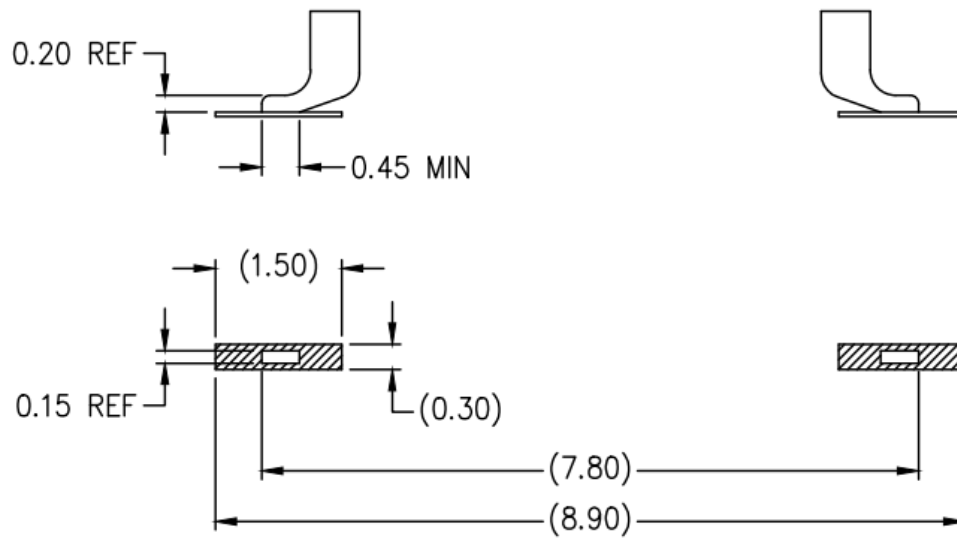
SODIMM DDR5 Surface Mount (SMT) Connector Socket Outline 4.0 mm height
